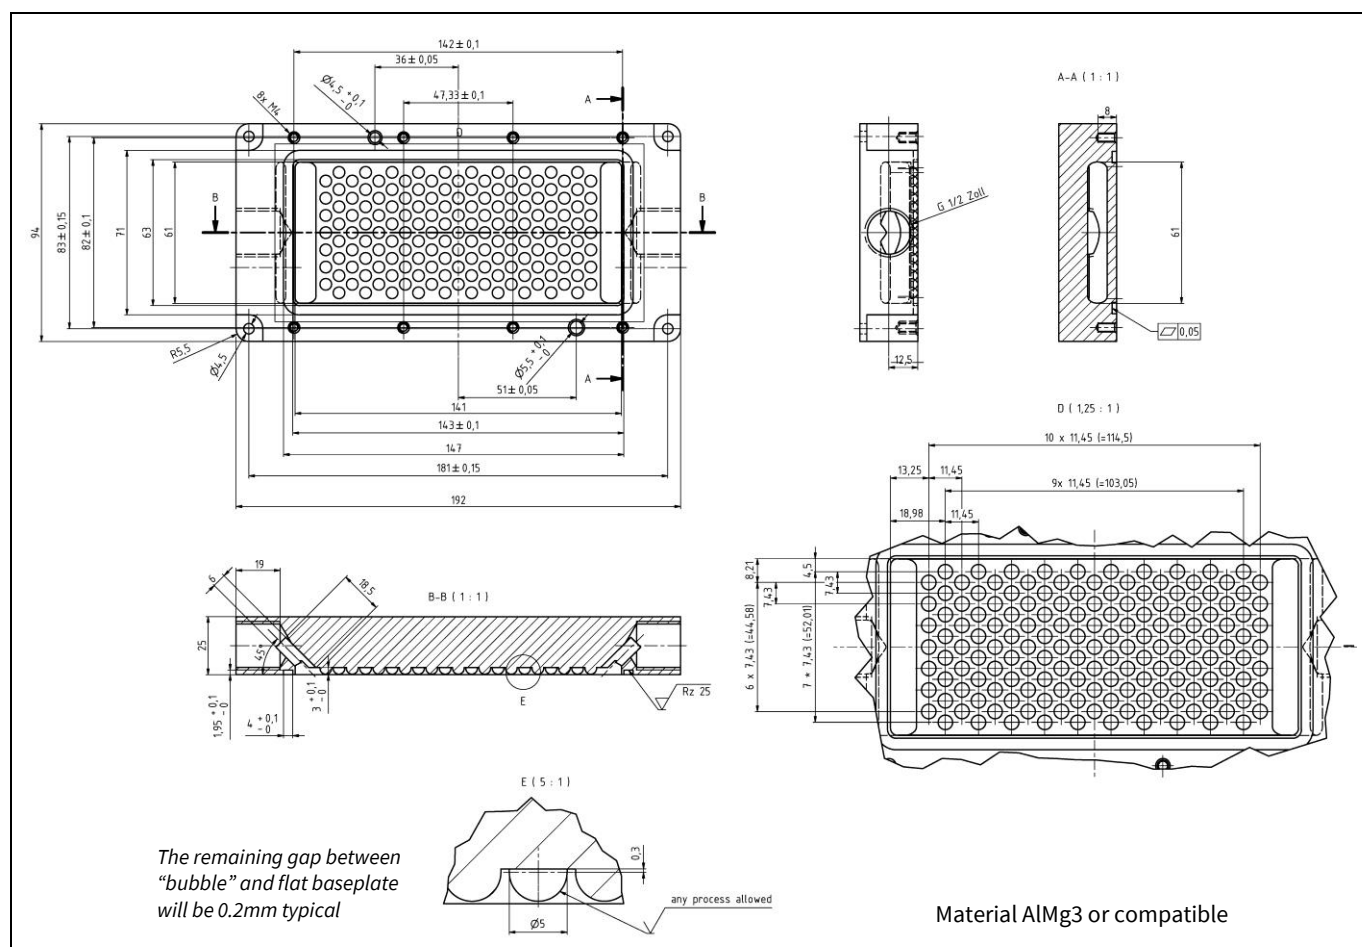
Cooler drawing example for HybridPACK Drive Flat Baseplate direct fluid cooled. The simple “bubble” structure in the cooler can be made with any process. It can be realized during aluminum die casting for example and does not need a post process rework.
